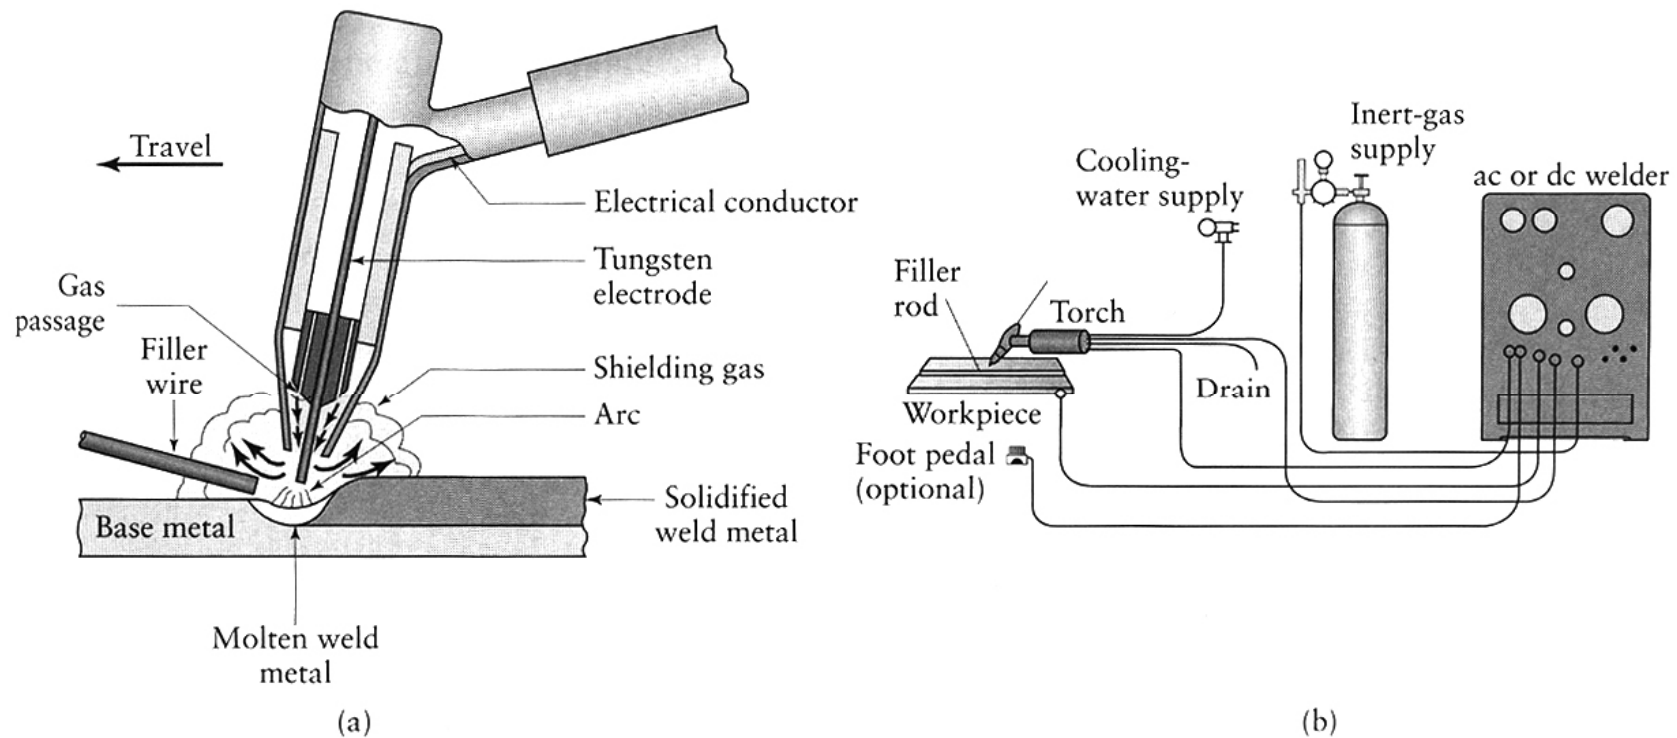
(a) Gas tungsten-arc-welding process, formerly known as TIG welding (for tungsten inert gas). (b) Equipment for gas tungsten-arc-welding operations.
